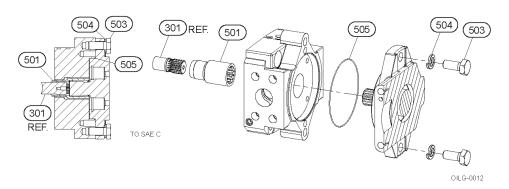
Cross Section and Exploded Parts Drawing for PVG 048, 065 and 075 (517105 sheet 1 and 2)
